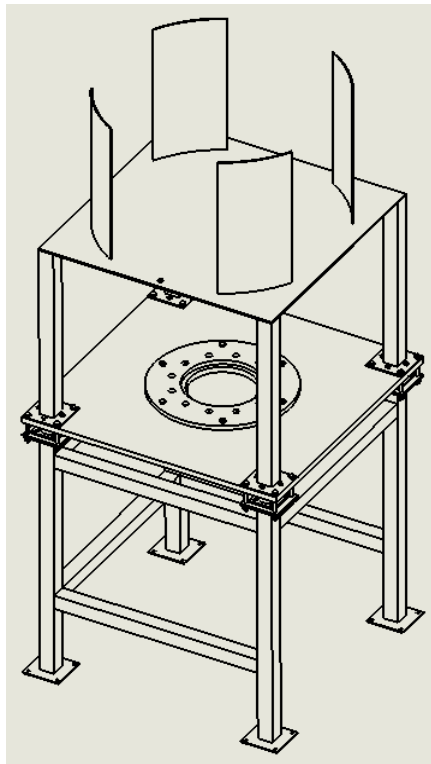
Catalytic reactor test bench assembly axonometry.
